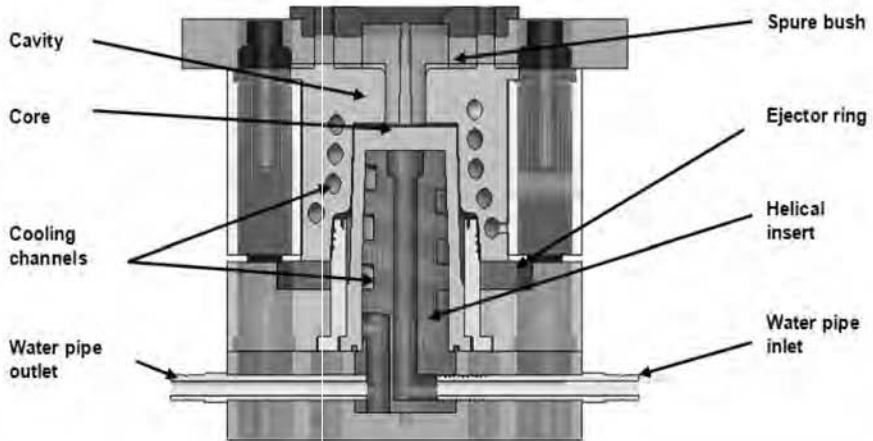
Mould of conformal cooling inside spiral and outside spiral
